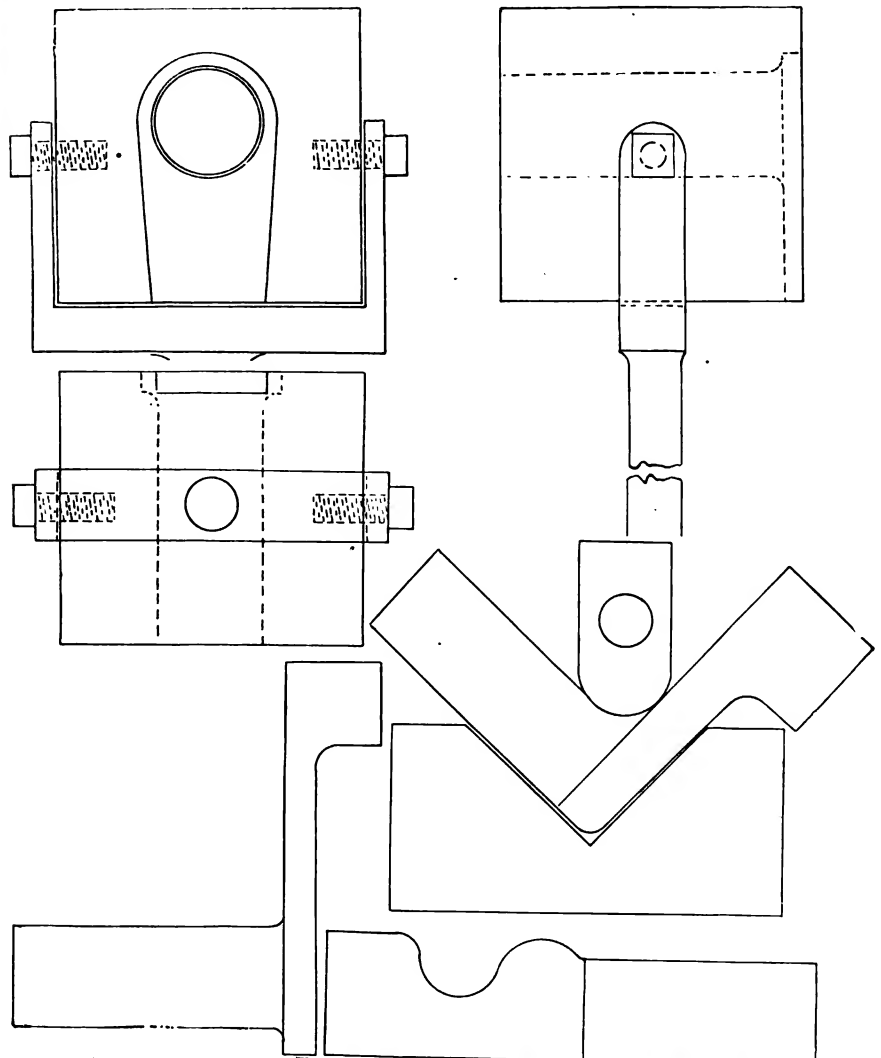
THE TOOLS AND METHOD FOR MAKING ROCKER ARMS
